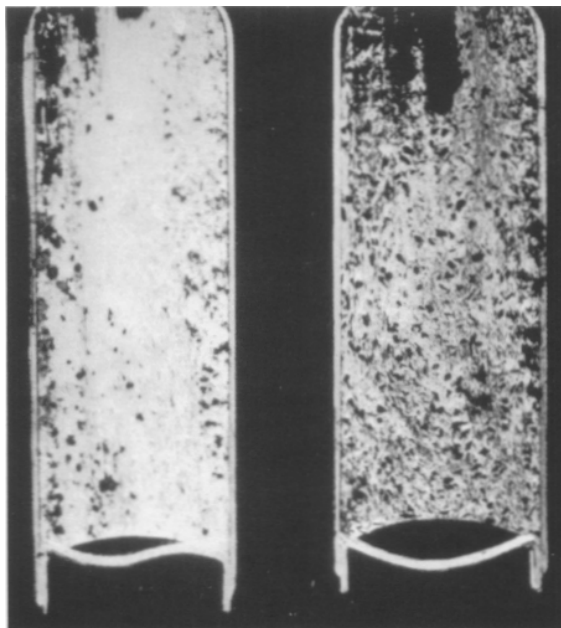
Cylinders manufactured with bottom head convex to pressure that have become bulged (partial bulge or reverse bending of the bottom)
